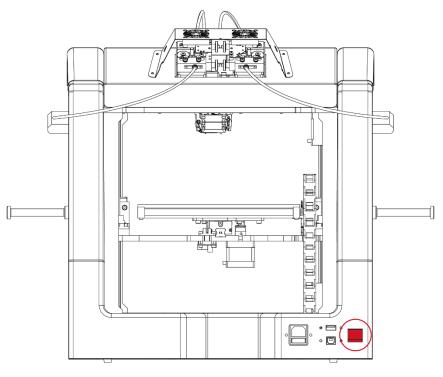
Switch of 3DGence DOUBLE P255 printer - rear view
